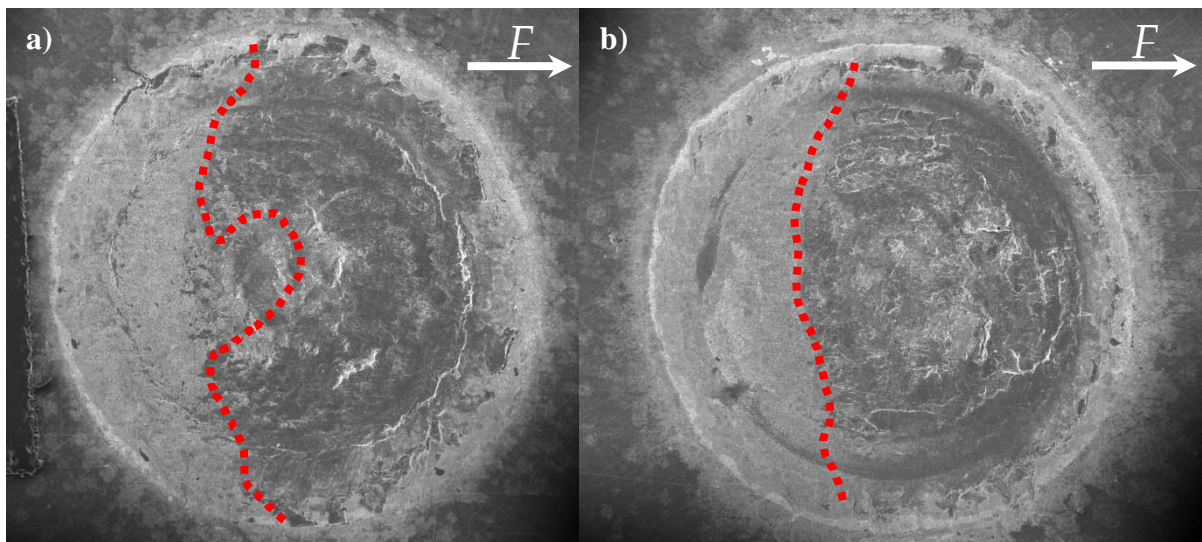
SEM fracture surface overview for welds produced with the reference welding parameters, and plunge depths equal to: a) 2.5 mm; and b) 2.8 mm.
